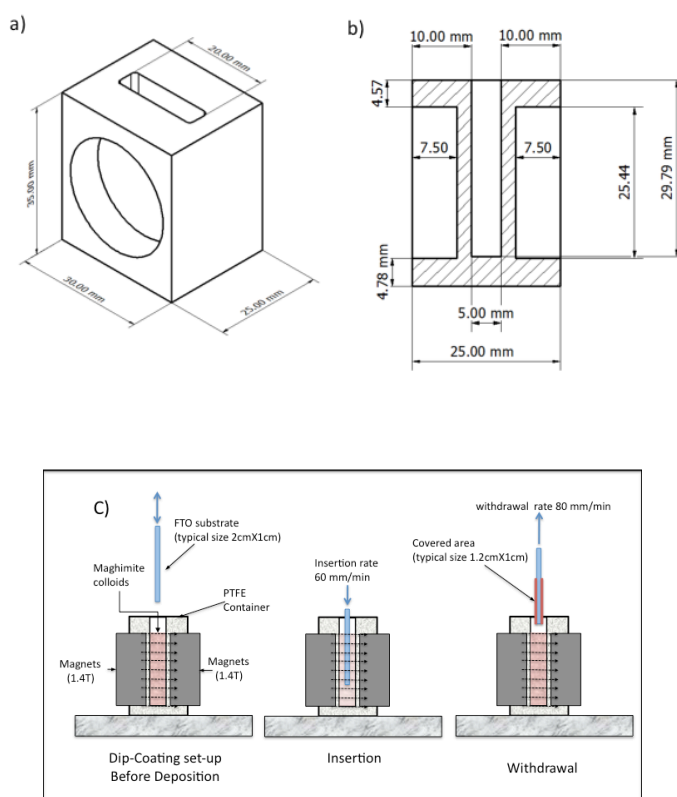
Dimensions of the PTFE container used in the dip-coating process with a magnetic field); a) Perspective image; b) cross-sectional image of the container with the dimensions; c) details about the dip-coating process.
